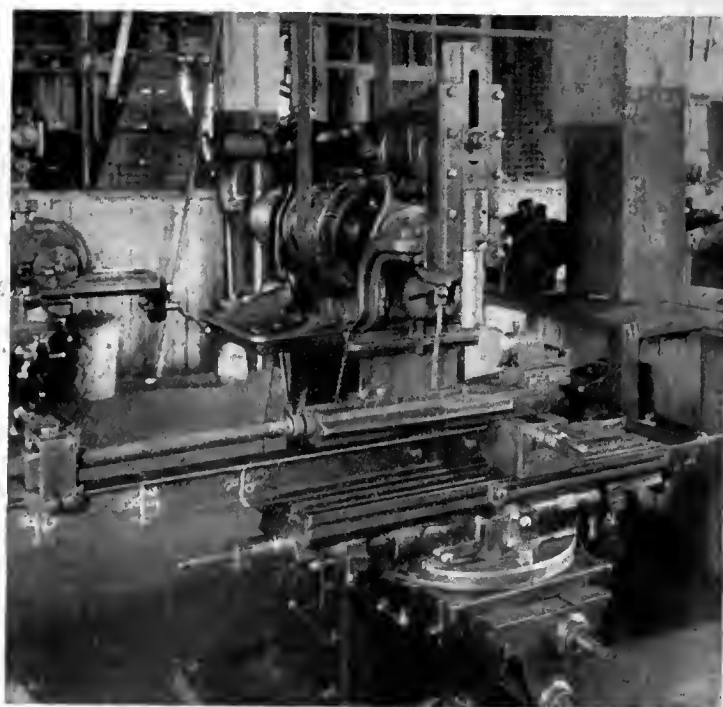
VIEW OF MILLING MACHINE WITH SLOTTING ATTACHMENT FOR CUTTING CYLINDRICAL LAPS
